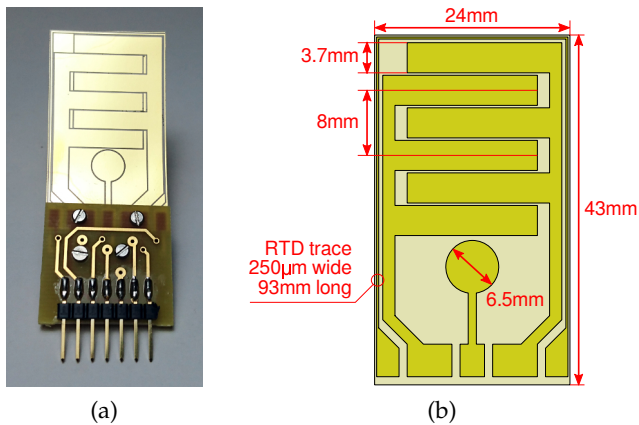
Multifunctional IDT: (a) picture; (b) dimensional drawing.
